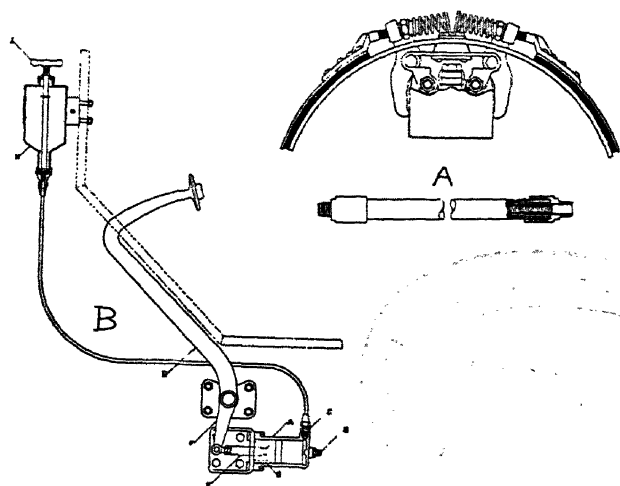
The Original Lockheed Hydraulic System of Braking. *A.* Brake Mechanism.
